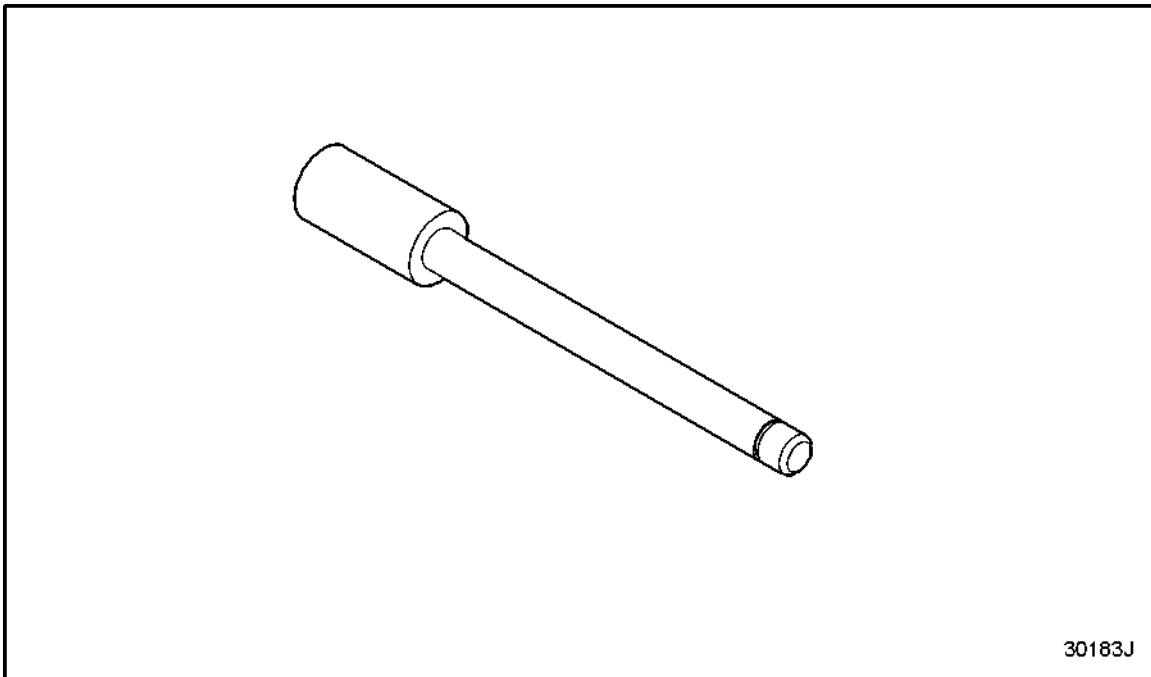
Cam Follower Service Fixture, J 33421-A
